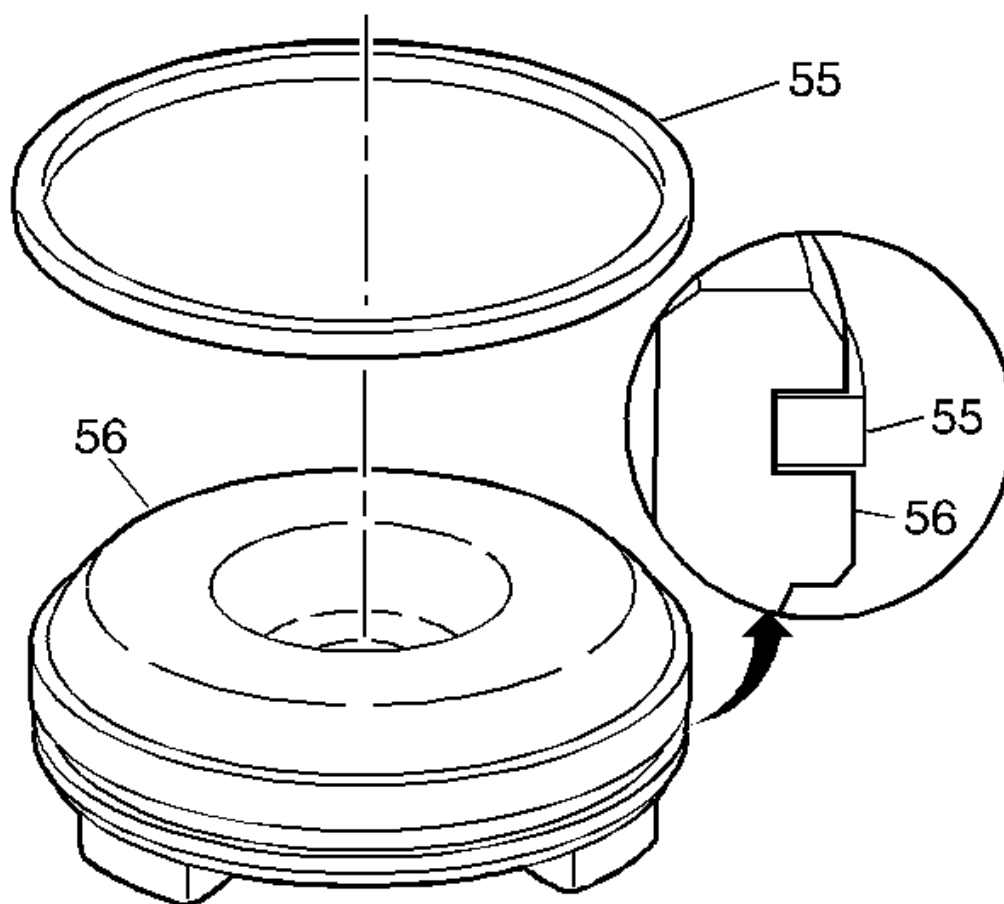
Identifying Intermediate Clutch Roller Outer Race Grooved Side
